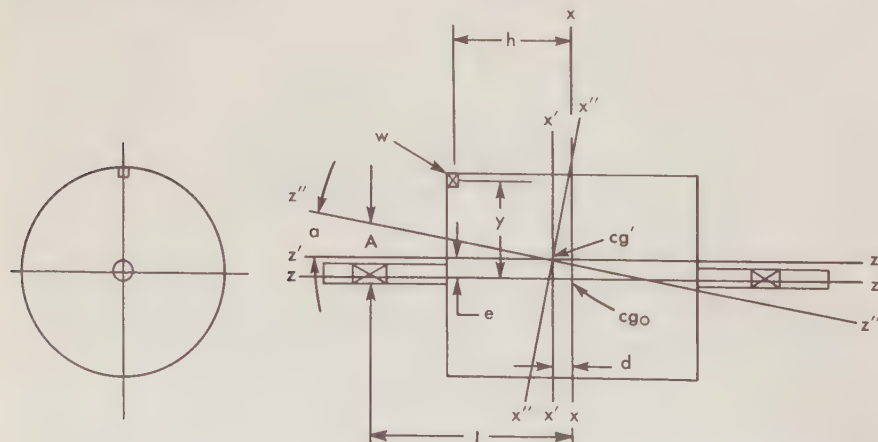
Diagram of rotor with displaced rotational axis caused by unbalance weight in rotor.
